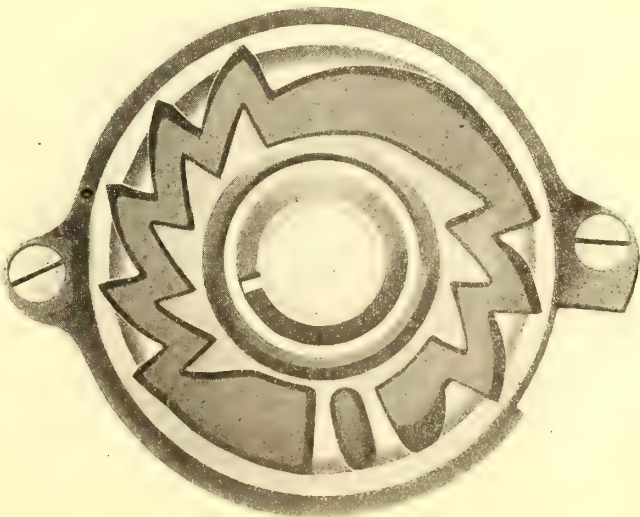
LOWER PART OF AUTOMOTONEER, SHOWING ZIG-ZAG GROOVE
